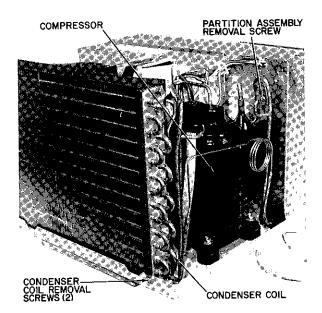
Condenser Coil/Partition Assembly Screws
